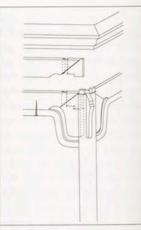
Drawing of a one-piece spandrel head joined with a dovetail key
